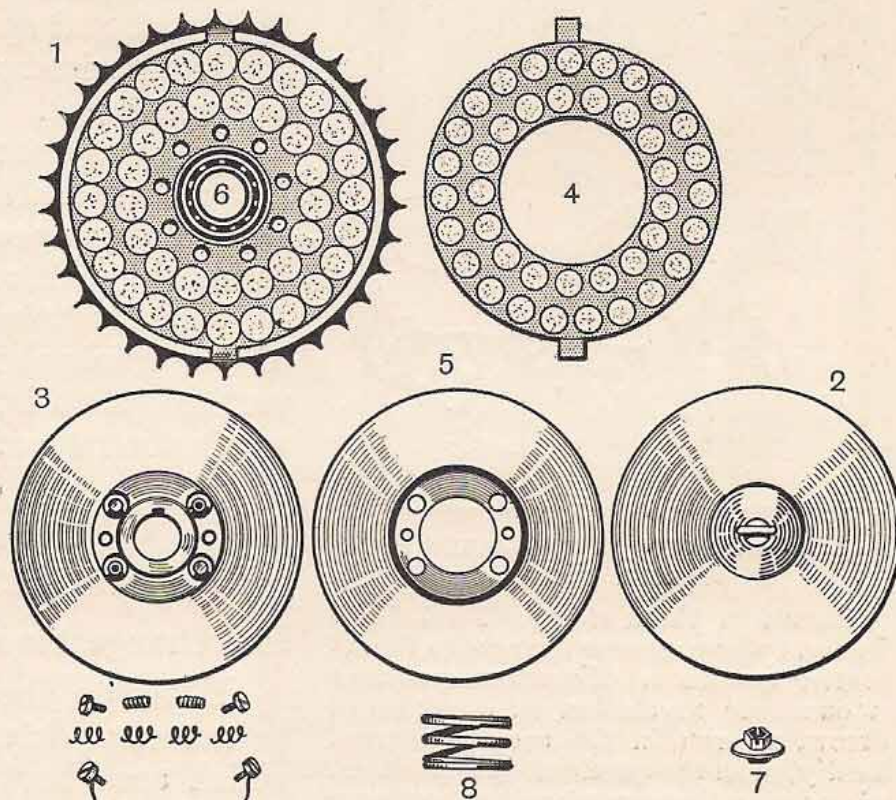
A.J.S. 4.98 H.P. AND TWIN CLUTCH PARTS.
